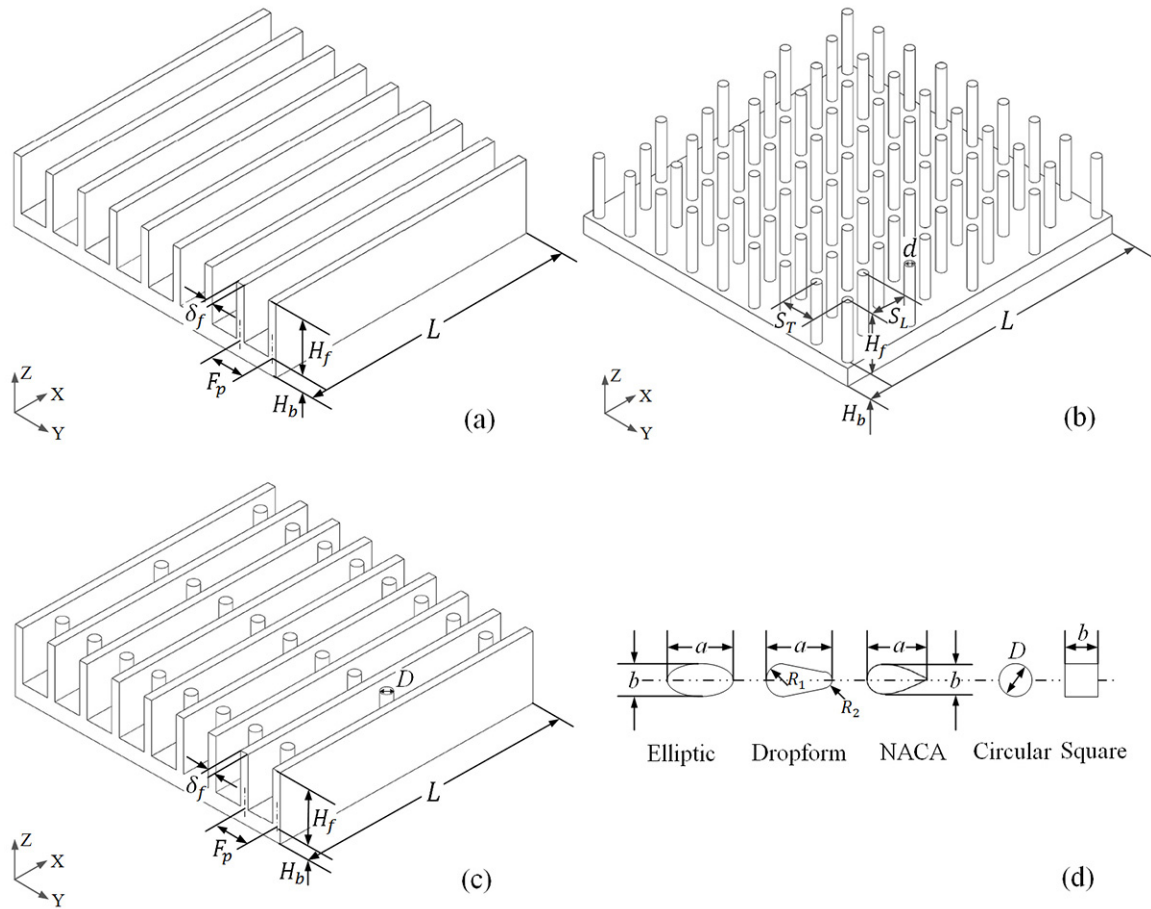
Some schematic diagrams: (a) Plate fin heat sink; (b) Pin fin heat sink; (c) Plate-pin fin heat sink; (d) Cross-sections of the five types of pins.
